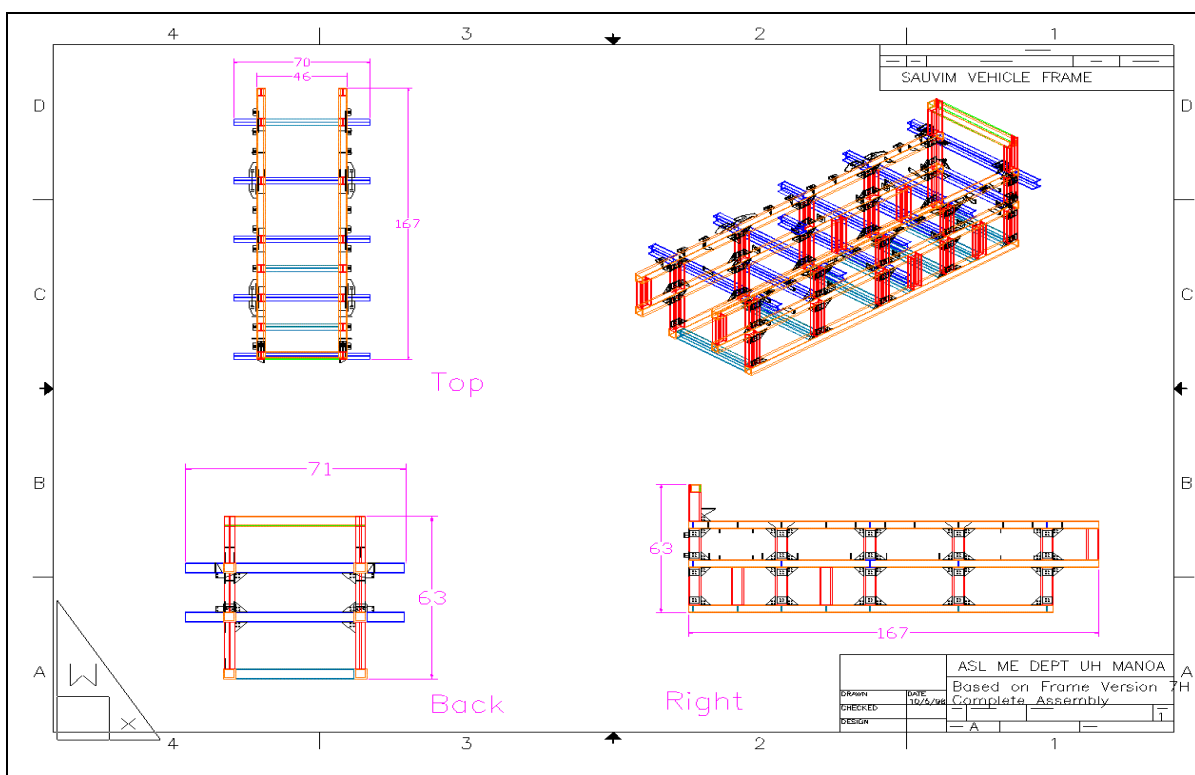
Three-View and Isometric Drawing of the SAUVIM Frame.
